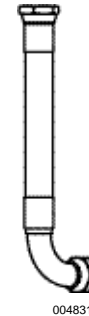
1.25 in. (32mm) Discharge Hose (Part No. 570141)
